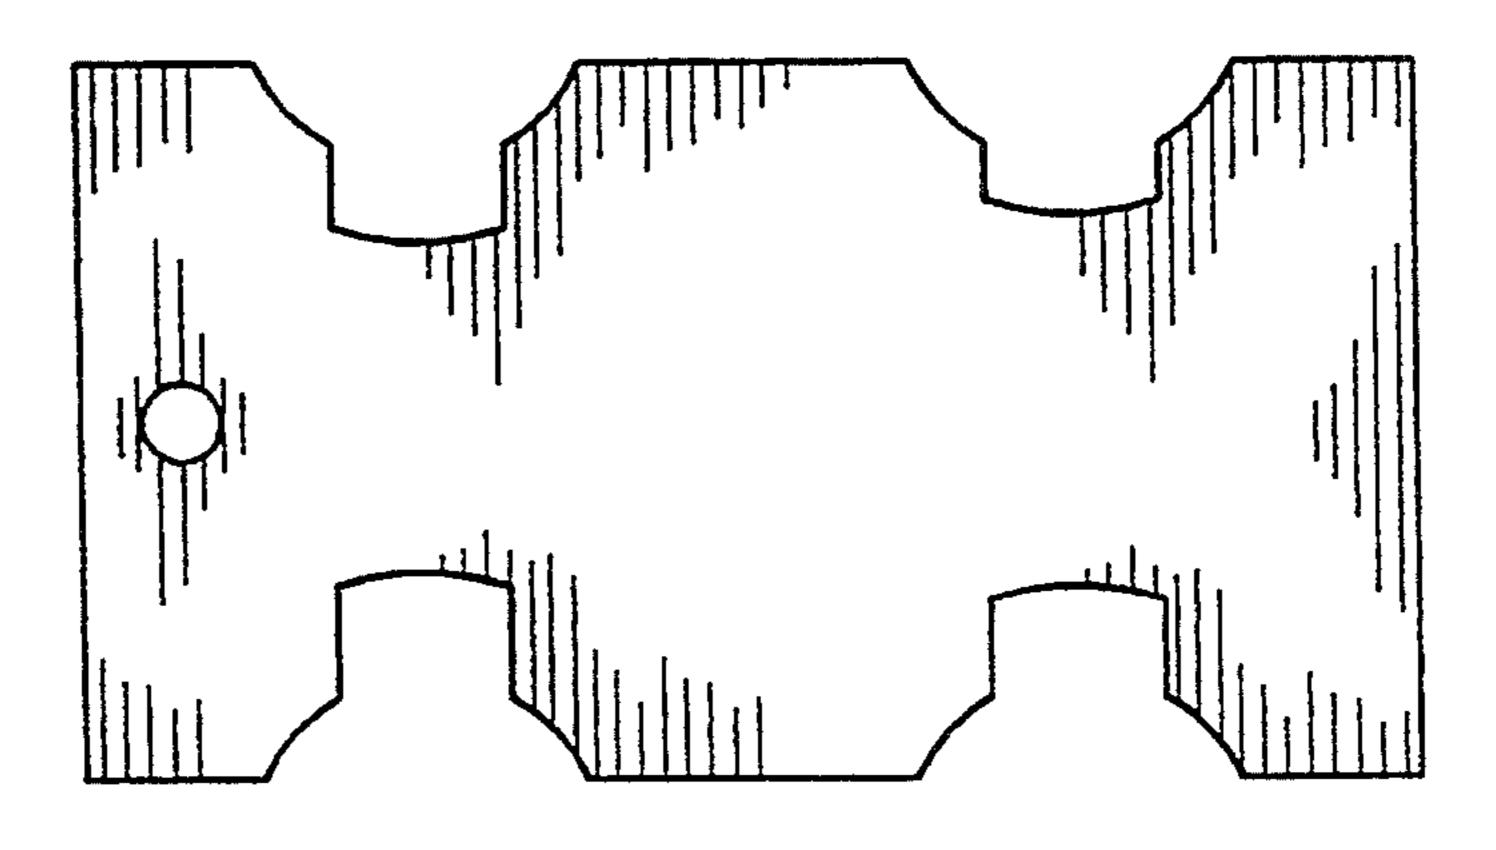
is a top view of the rod guide gauge as shown in FIG. 20;
